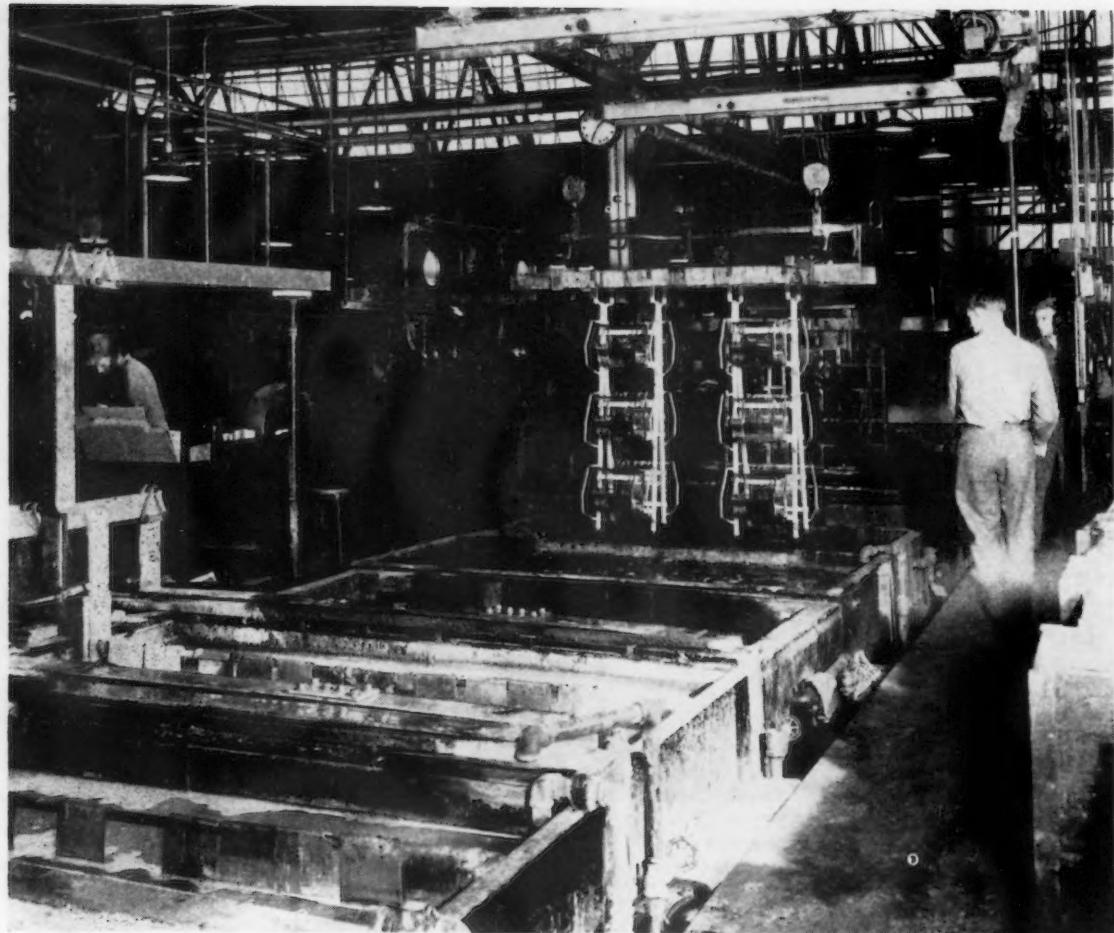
Chrome plating tanks for special plating jobs where the racks are walked by crane from tank to tank.
